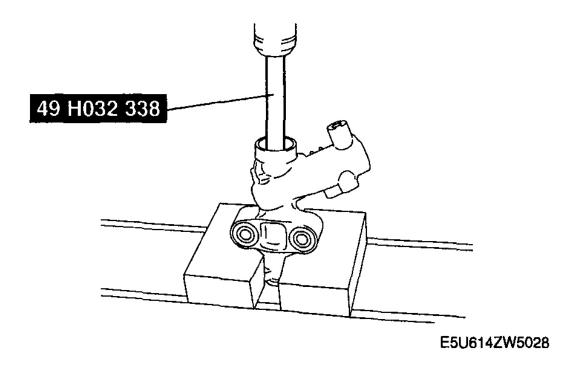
Removing Steering Rack, Oil Seal (Holder Side) Courtesy of MAZDA MOTORS CORP.
